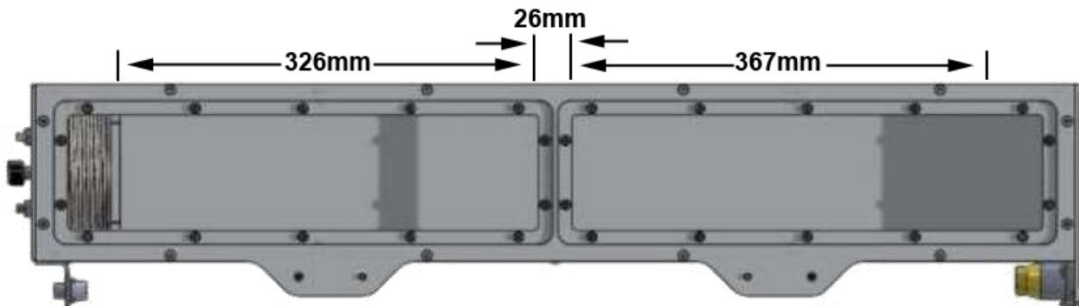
4: Top view of the NRCSD and access panel dimensions [21]
